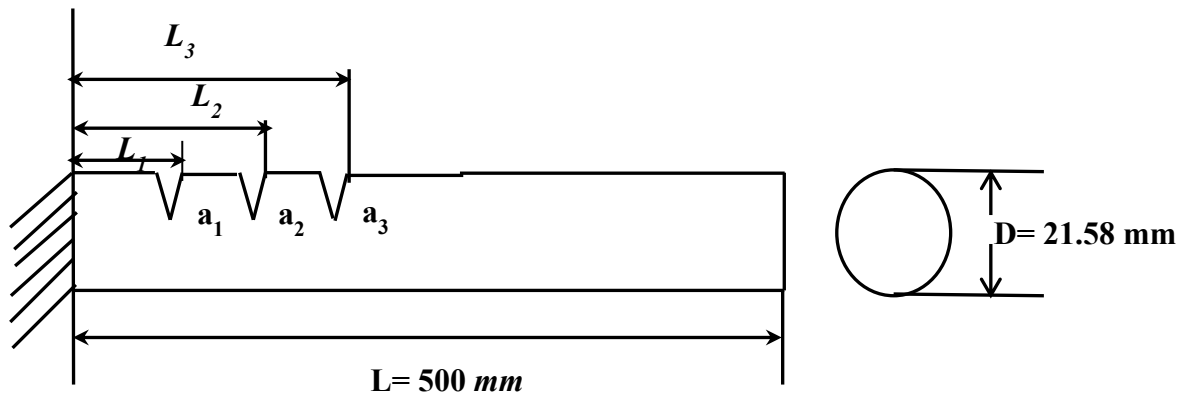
Sketch of multi-cracked beam of circular cross-section
